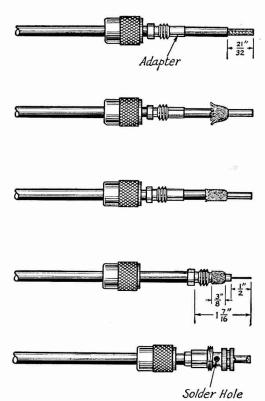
Method of assembling ½-inch cable, Amphenol Type 83-1SP (PL-259) plug and adapter.
